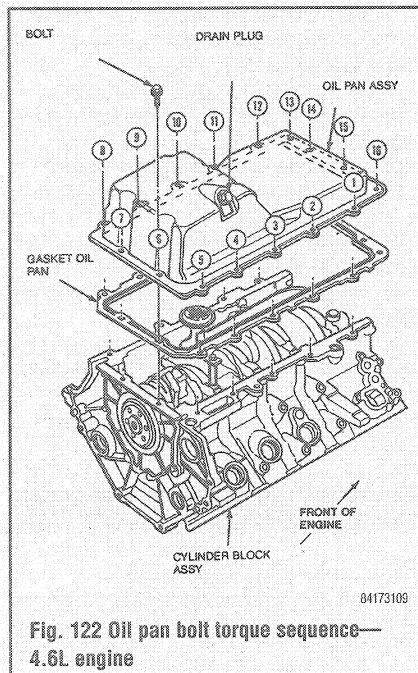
Oil pan bolt torque sequence—4.6L engine
